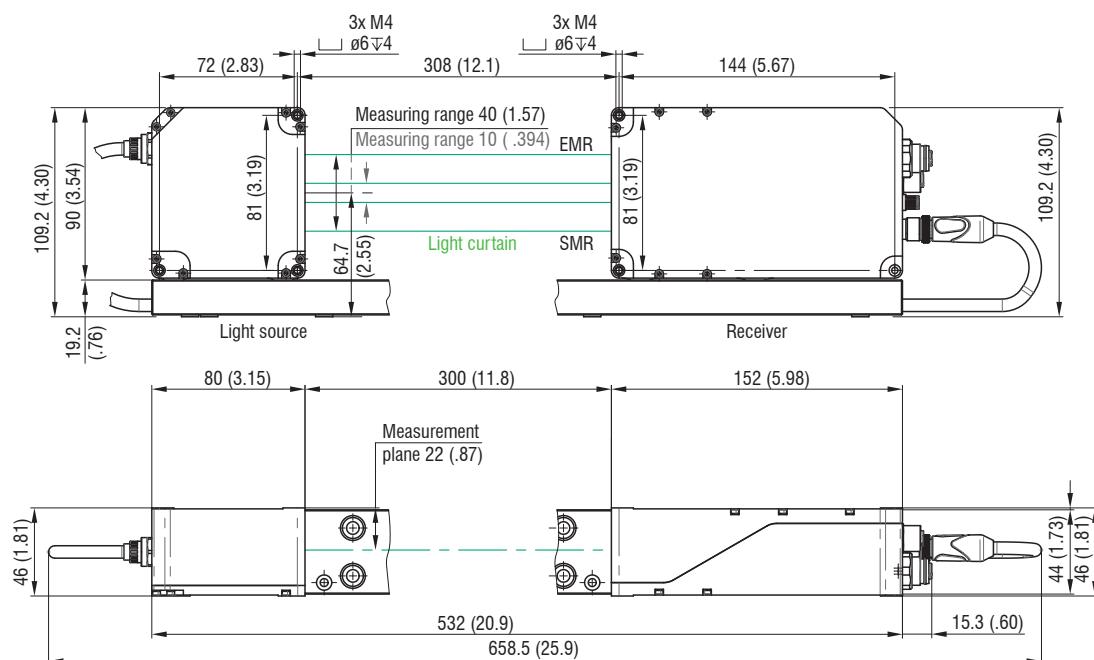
Dimensional drawing light source and receiver ODC2700-10, ODC2700-40, dimension in mm
